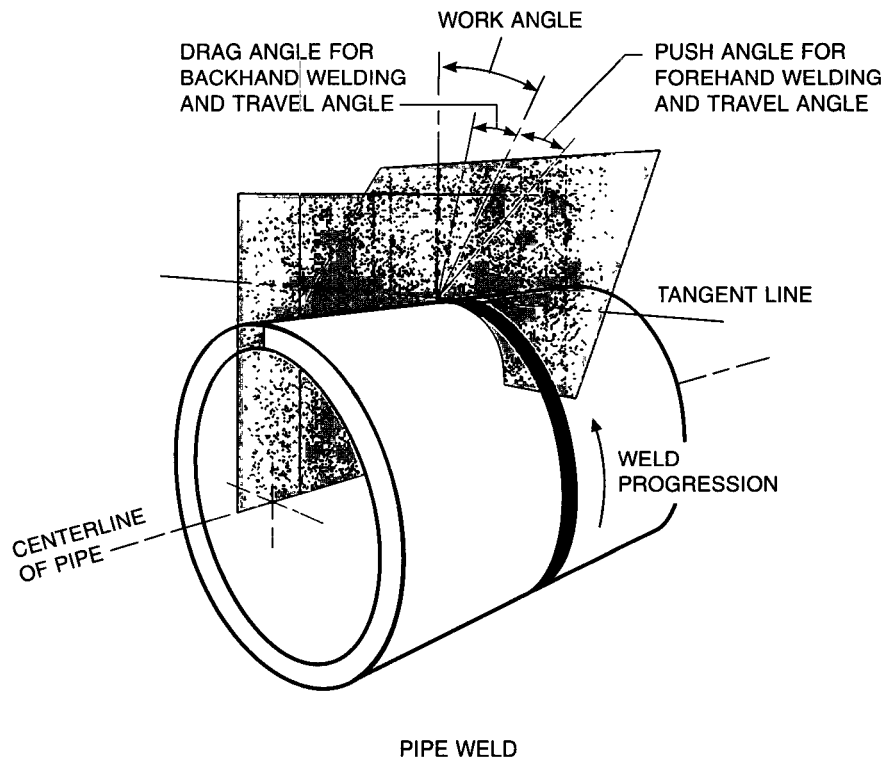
Position of Electrode, Gun, Torch, Rod, or Beam for Pipe Welding
